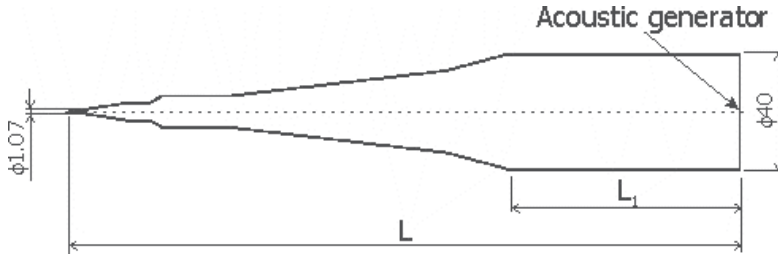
Schematic drawing of the confuser-shaped tube with circular cross-section
